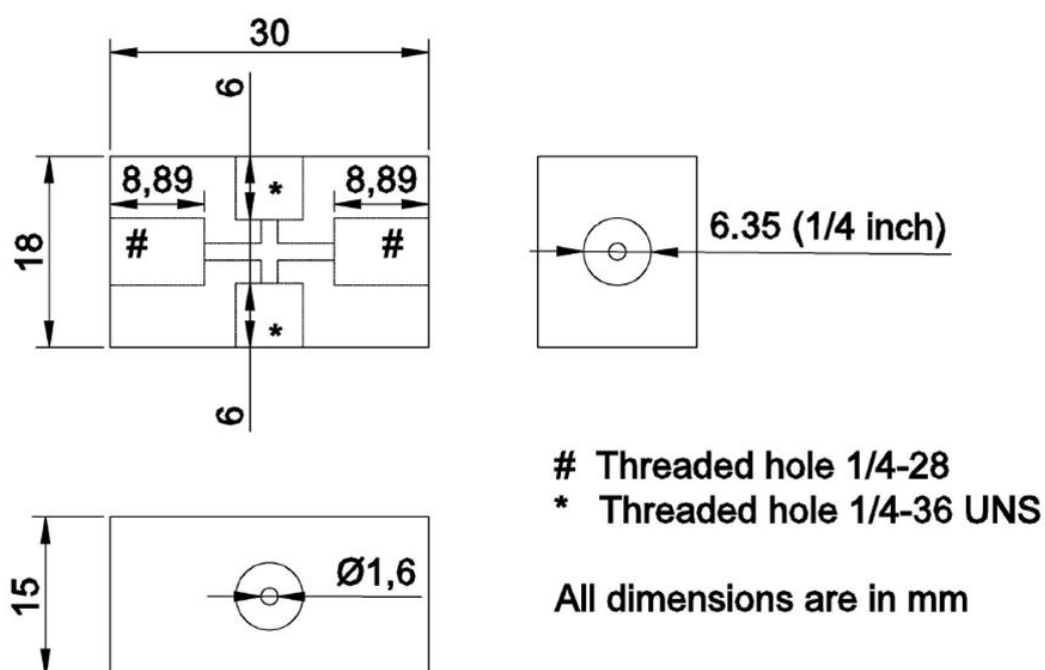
Drawing of the flow cell comprehensive of detailed dimensions.
